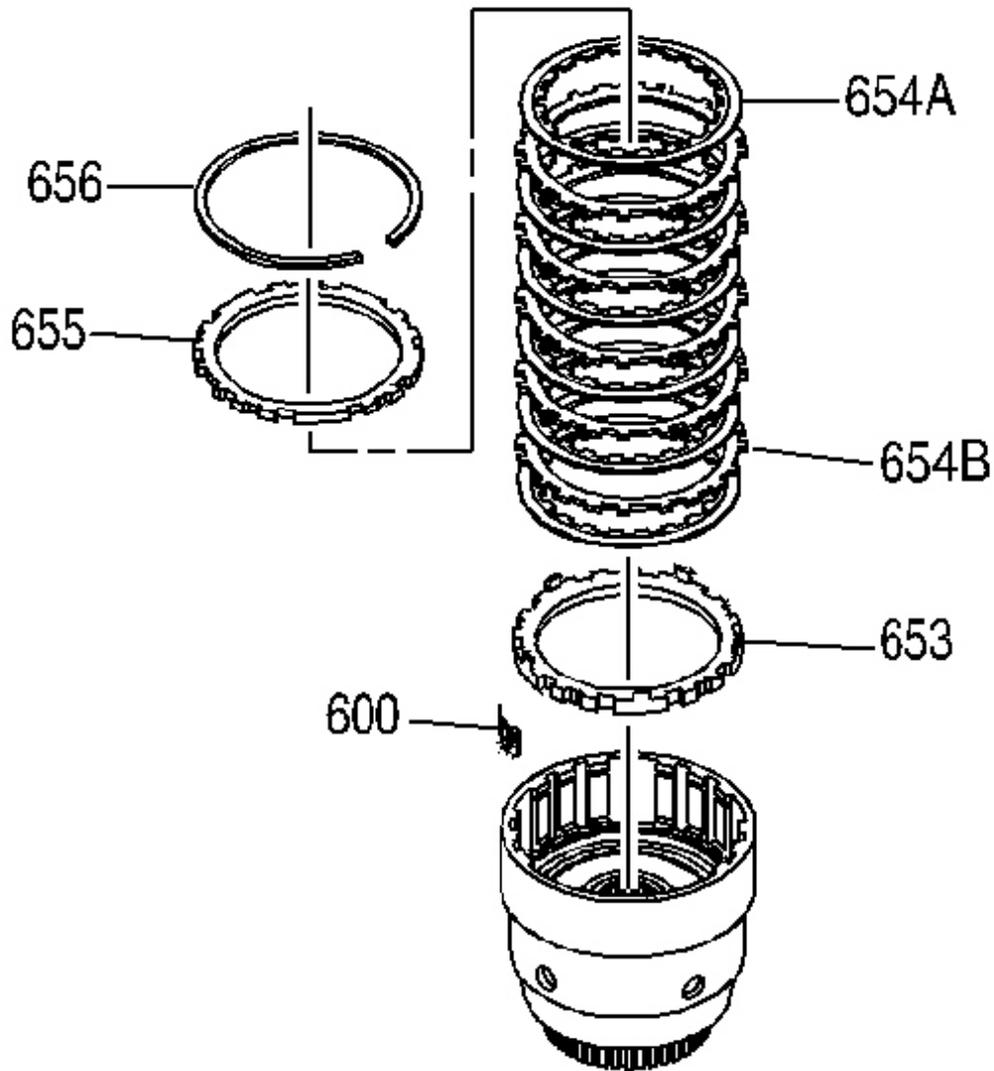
3rd & 4th Clutch Backing Plate Retainer Ring
